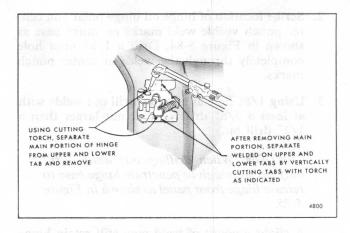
Body Side Door Hinge Strap Removal - "H" Styles
